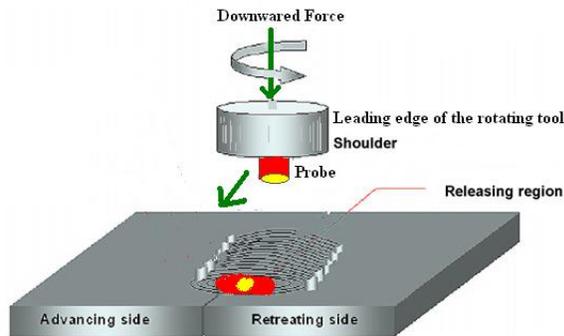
A schematic representation of the Friction stir welding process
